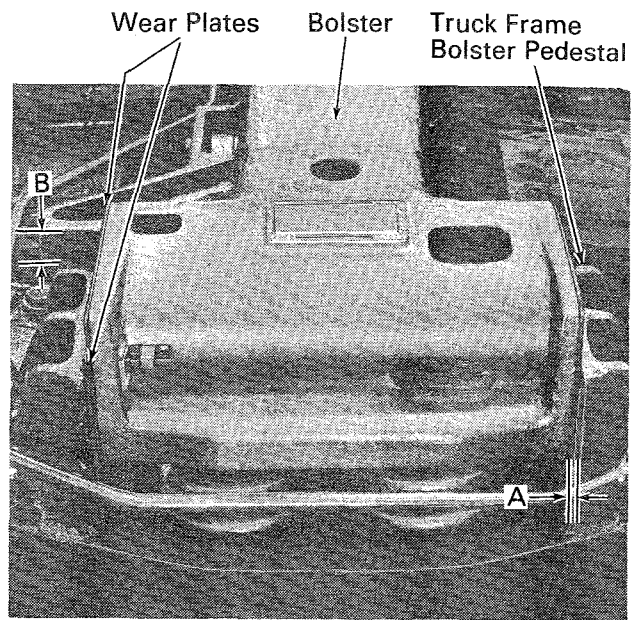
GB Truck Frame Pedestal And Bolster Wear Plate Clearance Limits
